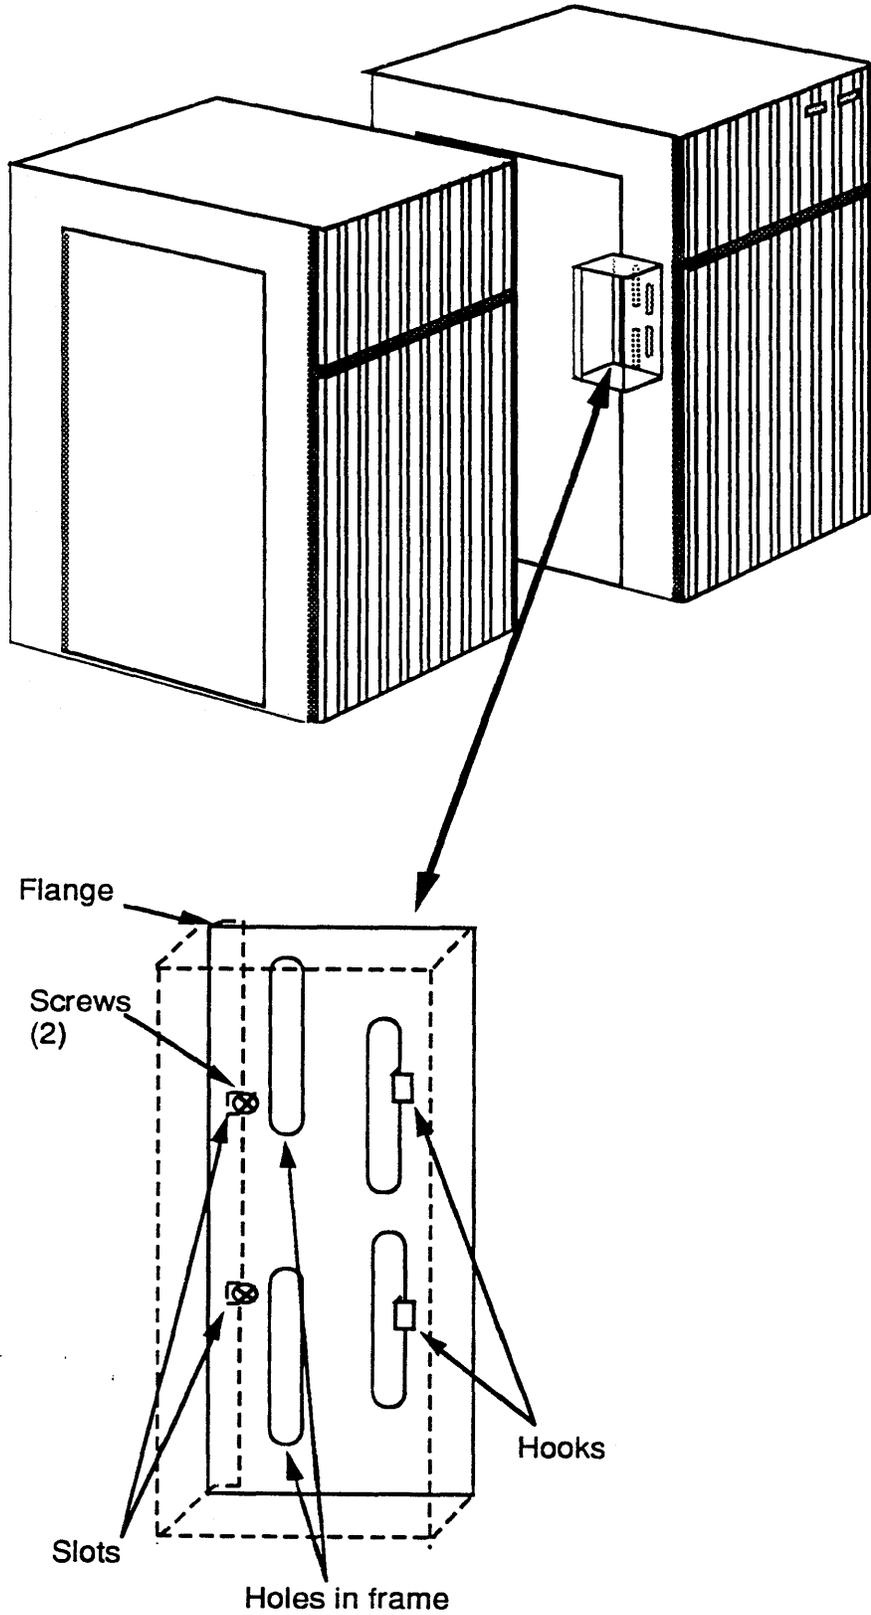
Mounting the IOM/IOSBA Cable Shield
